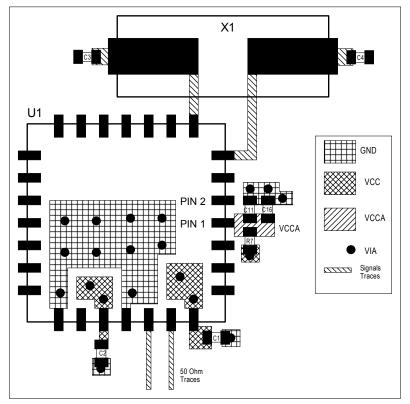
B. ICS84329B PCB Board Layout for ICS84329B 28 Lead PLCC
